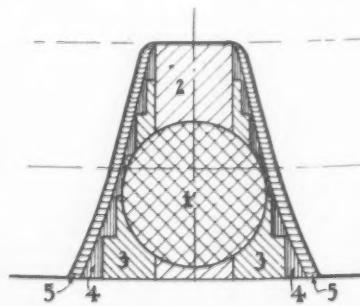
Method of roughing out a large tooth space with a drill and slotted cutter. (1) Drilled hole; (2) first slotting stroke to full tooth depth; (3) staggered slotting cuts; (4) rough form slotting cuts, and (5) metal left for final finishing cuts.
